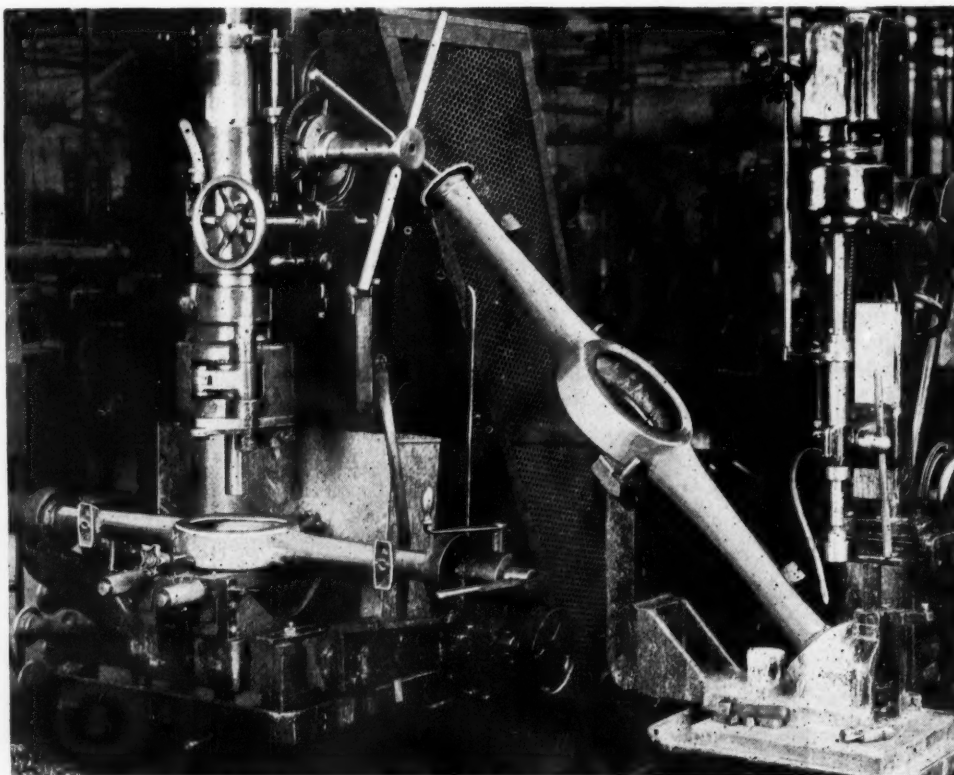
Facing forward banjo face in Baker drill fitted with constant feed head. At right, set-up for drilling and tapping only angle holes in Leland and Gifford drill press
